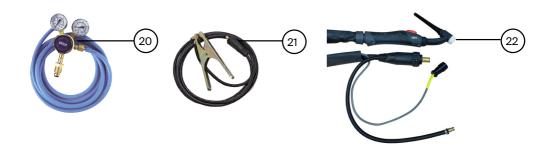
Weldarc 200 AC/DC Power Source Assembly
